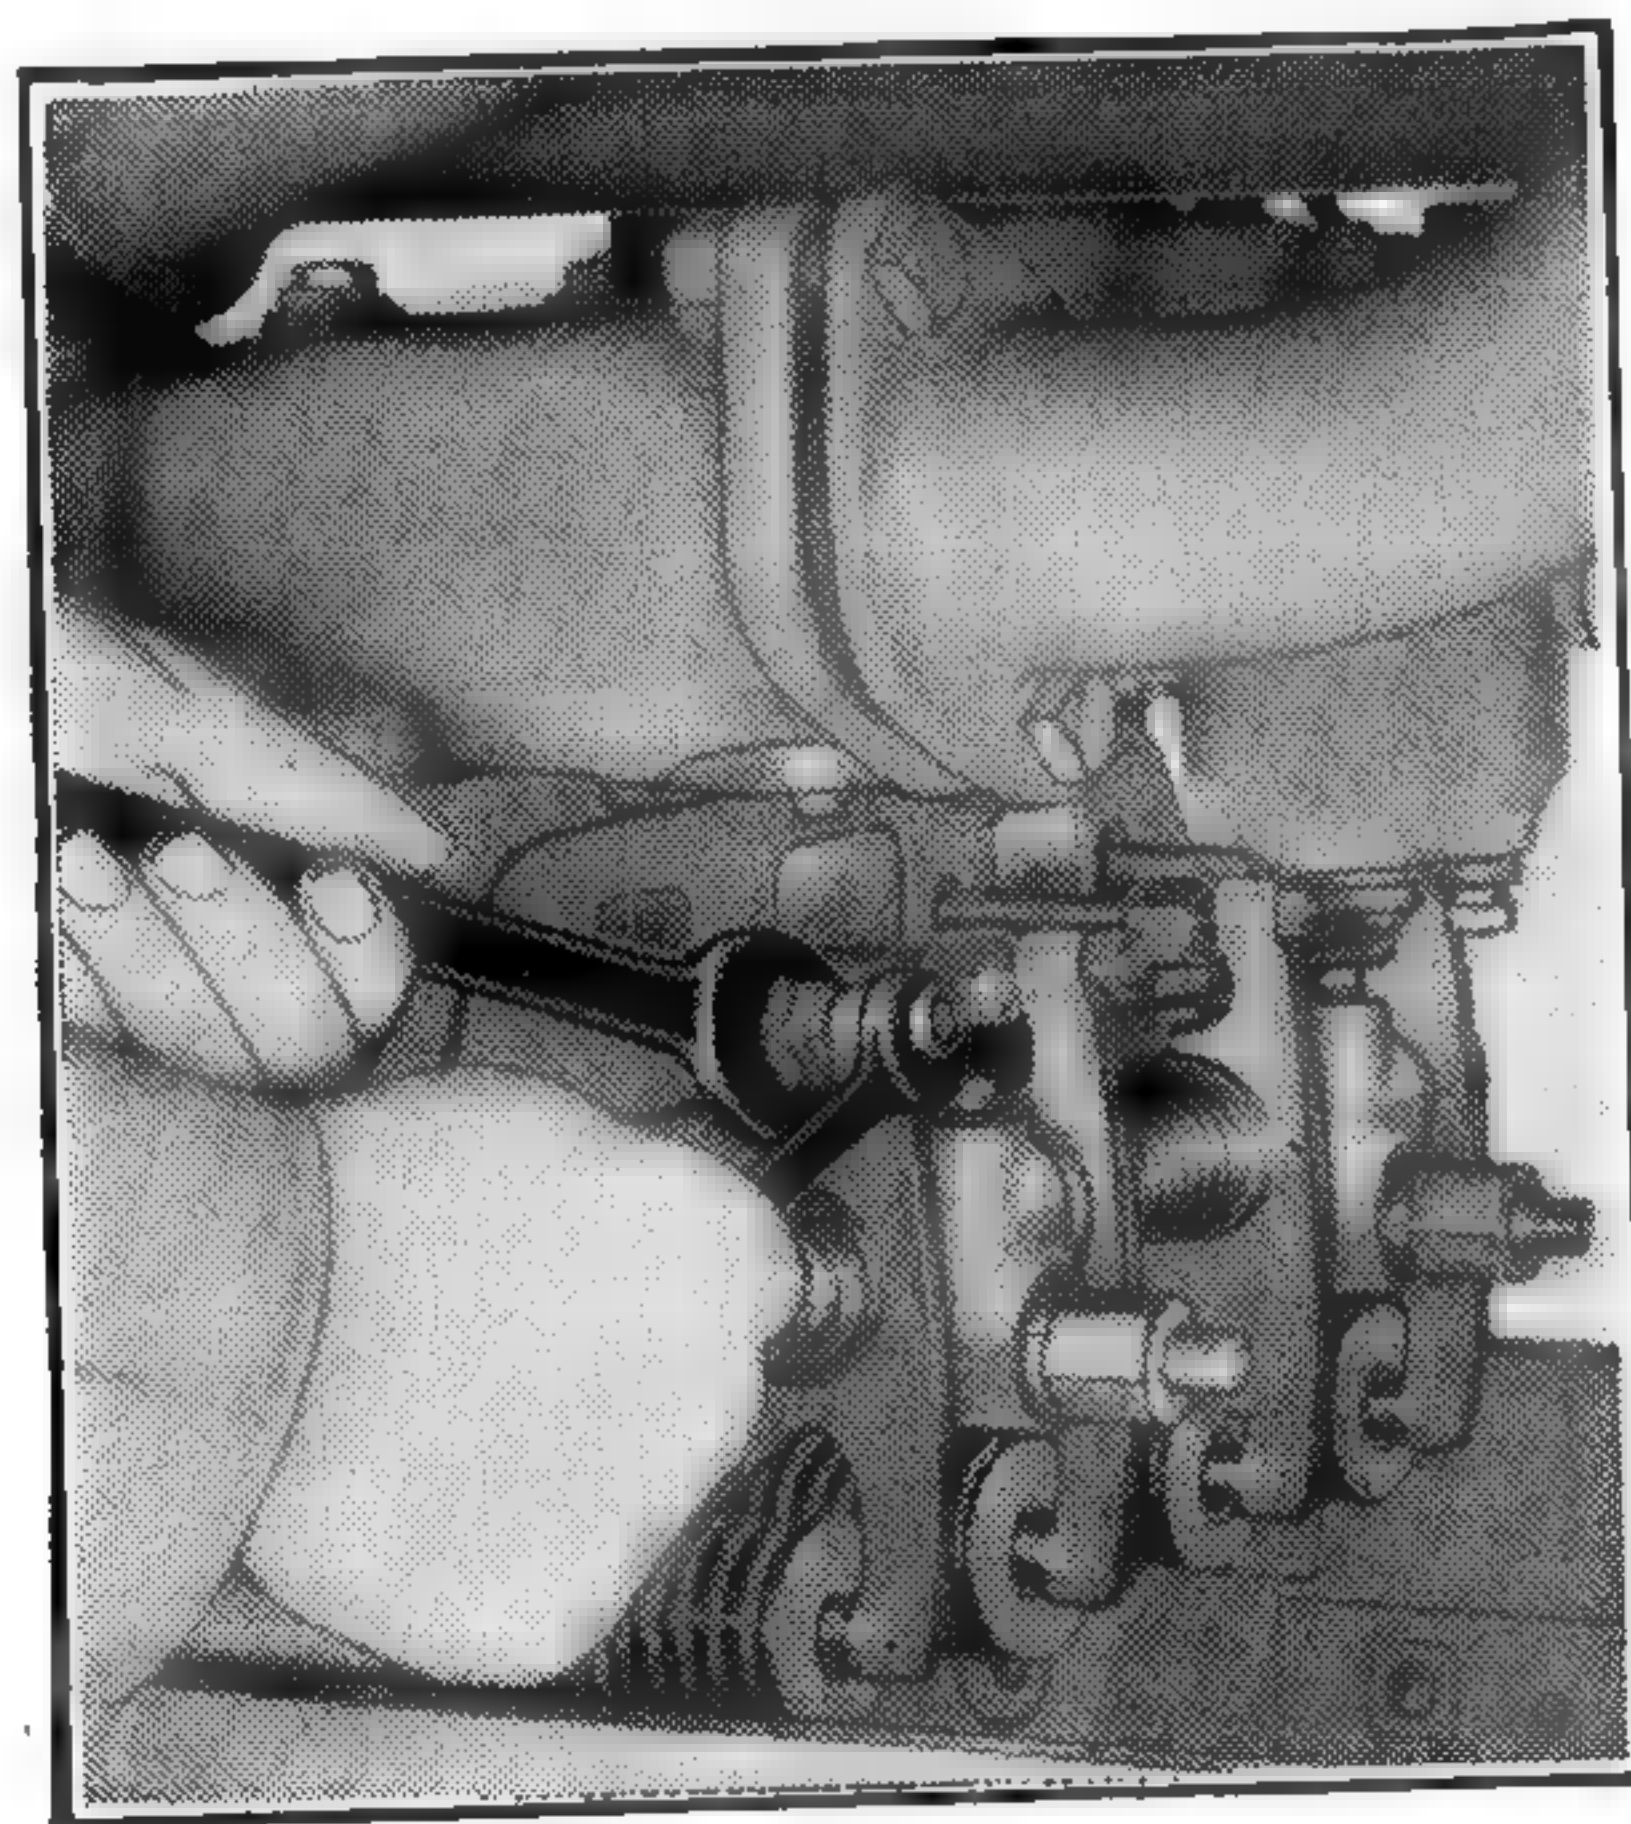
Thickness gauges should be used when adjusting valve tappet clearance.
